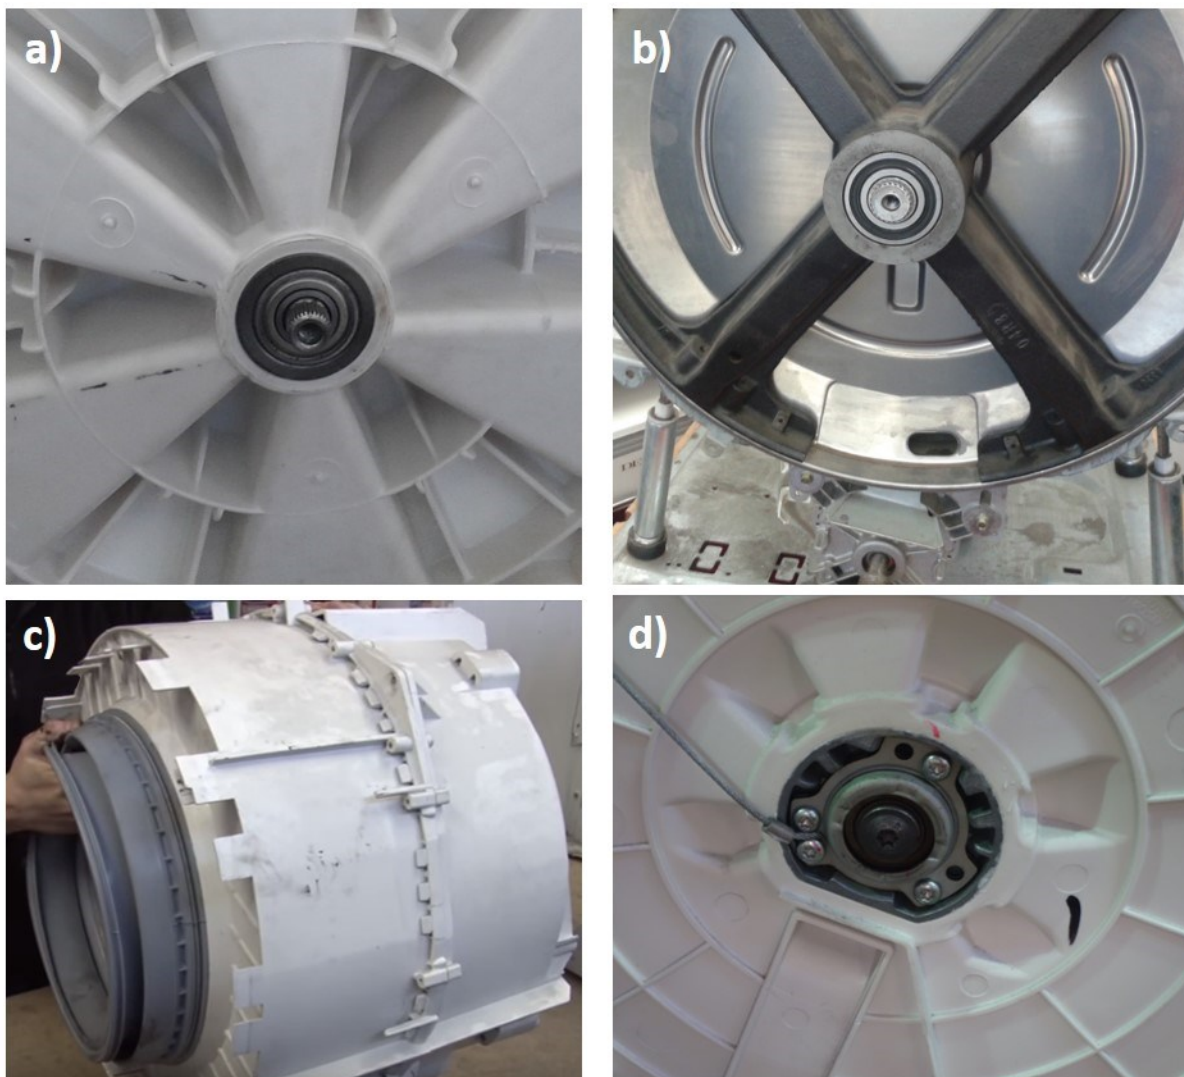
Examples of different design for WM bearings: (a) sealed in a single piece plastic tub; (b) sealed in a metallic tub; (c) example of a 2-piece plastic tub; (d) fastened with screws to a plastic tub (vertical load machine).
